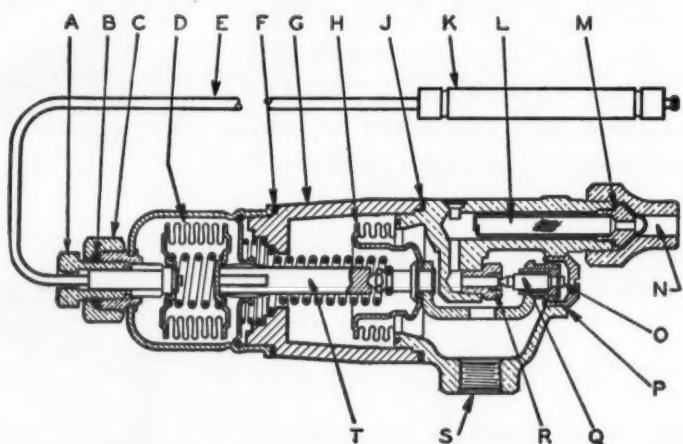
Detroit Lubricator adjustable thermostatic expansion valve. Parts of the valve are designated by letters as follows: (A) adjusting screw; (B) packing around adjusting screw; (C) packing nut; (D) thermostatic power element; (E) flexible capillary tube; (F) moisture-tight joint; (G) bakelite extension; (H) bellows seal; (J) moisture-tight joint; (K) thermostatic bulb; (L) strainer screen; (M) copper gasket; (N) inlet connection for 1/4-inch copper tube; (O) needle swivel; (P) solder-sealed plug; (Q) stainless steel needle; (R) stainless steel seat; (S) outlet connection; (T) bakelite push-rod.
